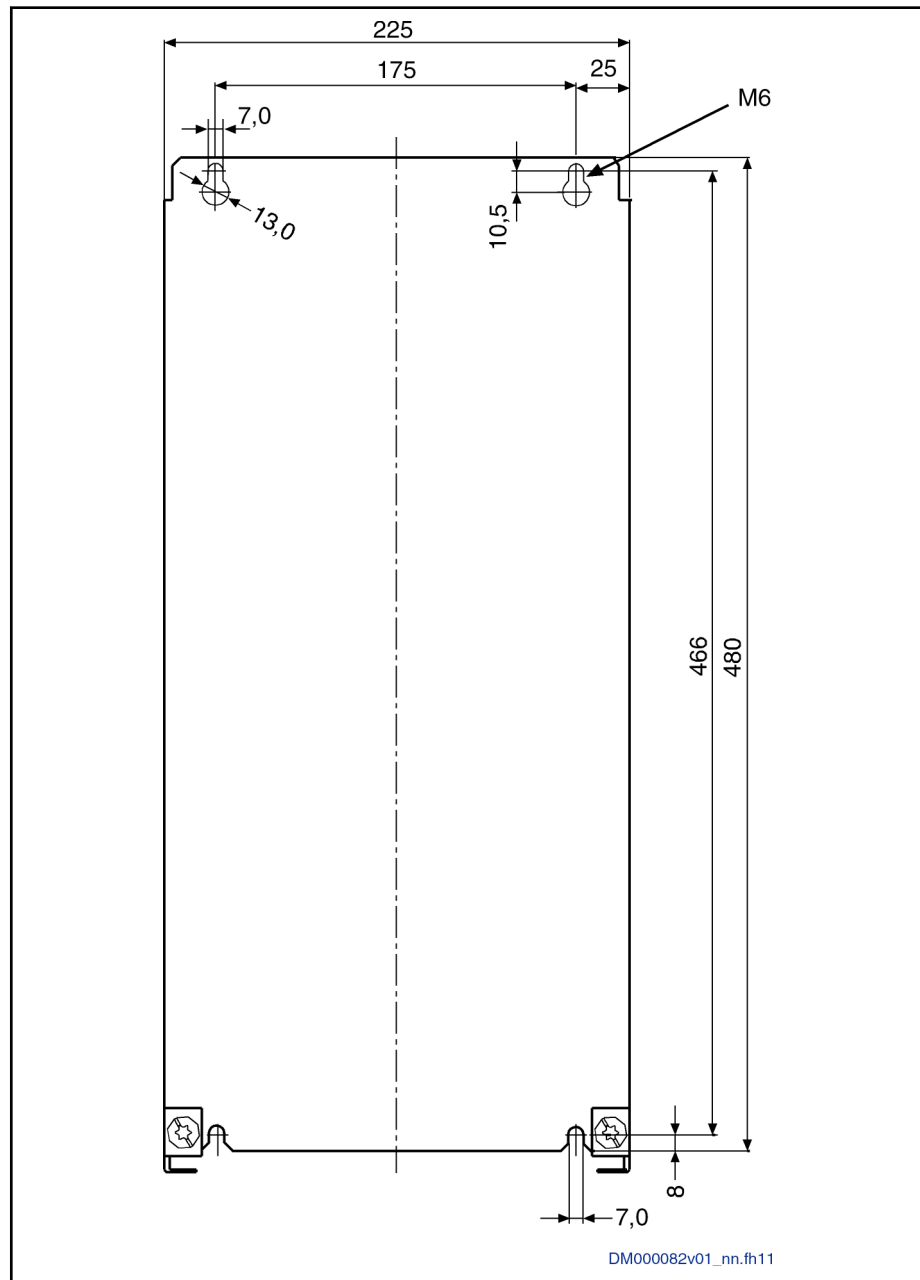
Boring dimensions HCS03.1E-W0100 and HCS03.1-W0150
